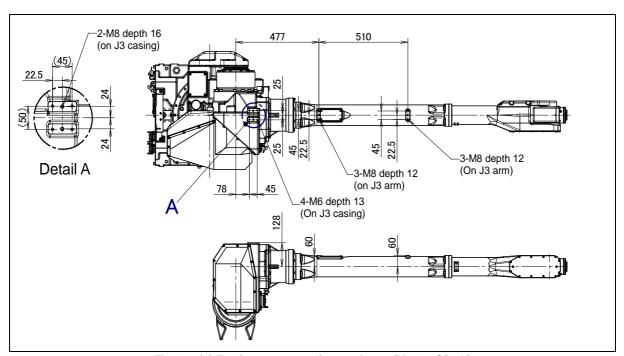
(a) Equipment mounting surfaces (M-710iC/20L)
